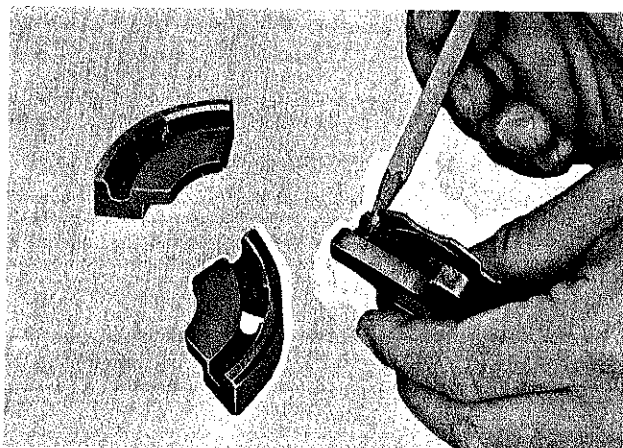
Wear on the clutch rotor is usually most severe on the outer corners where hammering takes place. The rotor plate should be checked for cracks and looseness at the center where it is attached to the hub.
